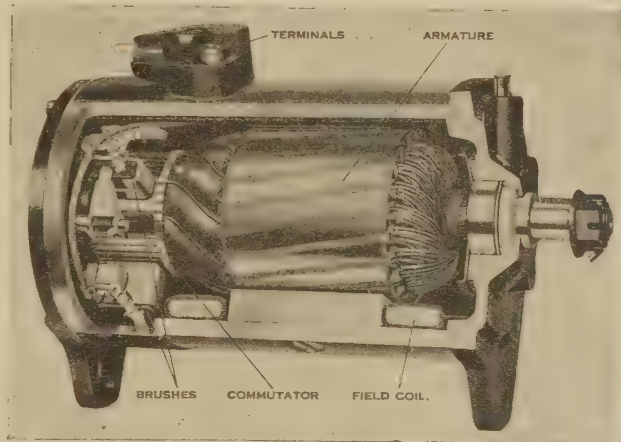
Typical Lucas Generator in Part-sectional View.
